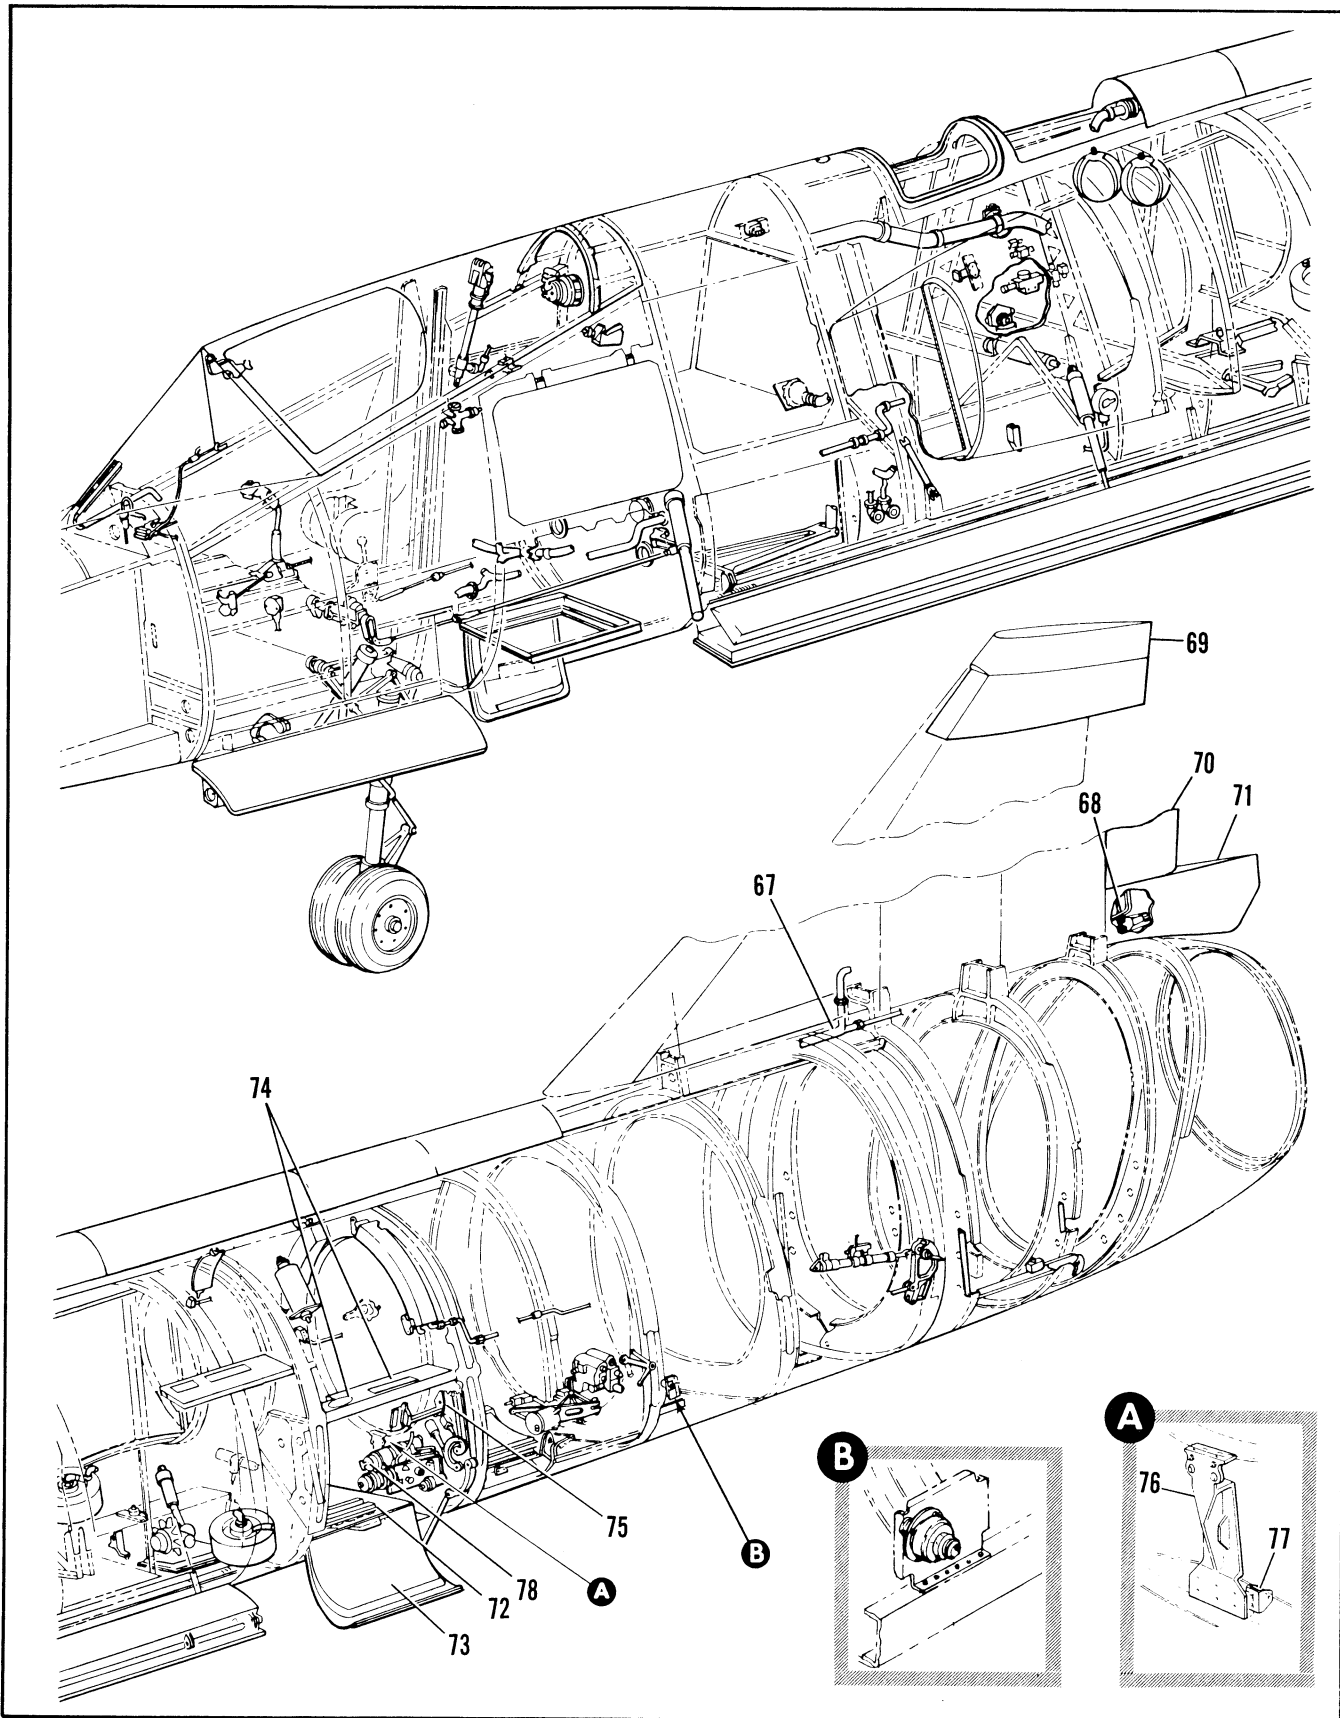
General Fuselage Assembly (Sheet 6 of 8)
